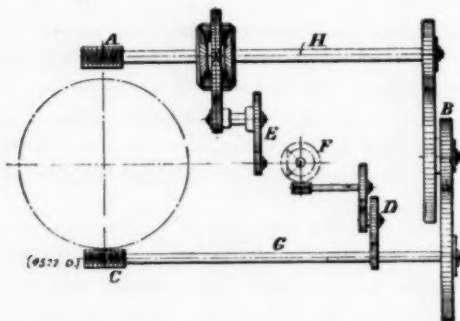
HOBGING MACHINE WITH A DIFFERENTIAL GEAR IN THE HOB DRIVE
